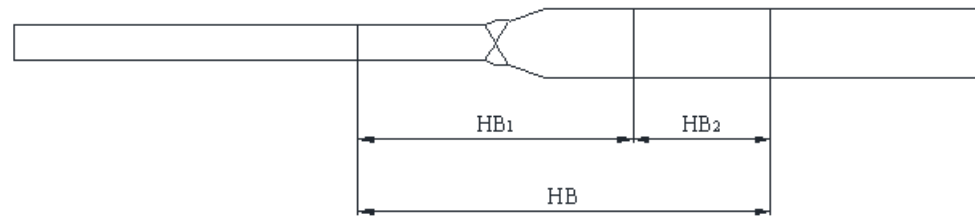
Layout of heat band for PWHT of welded joint with dissimilar thicknesses.
